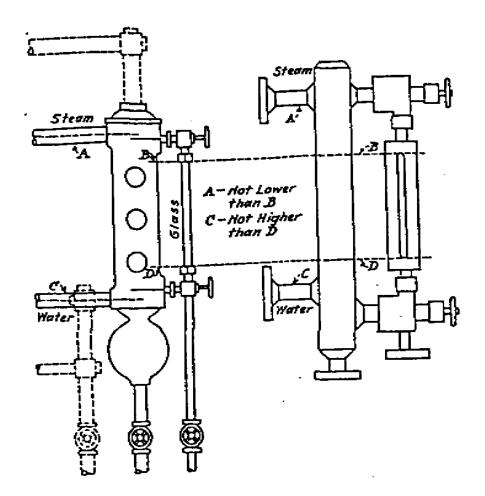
Typical Arrangement of Steam and Water Connections for a Water Column
